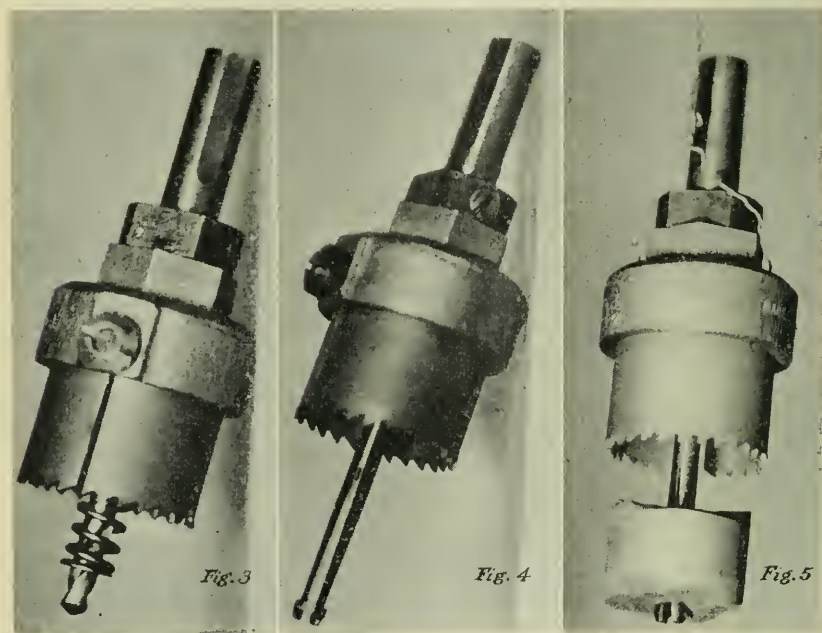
Tool used for trepanning a plug from a welded seam.
